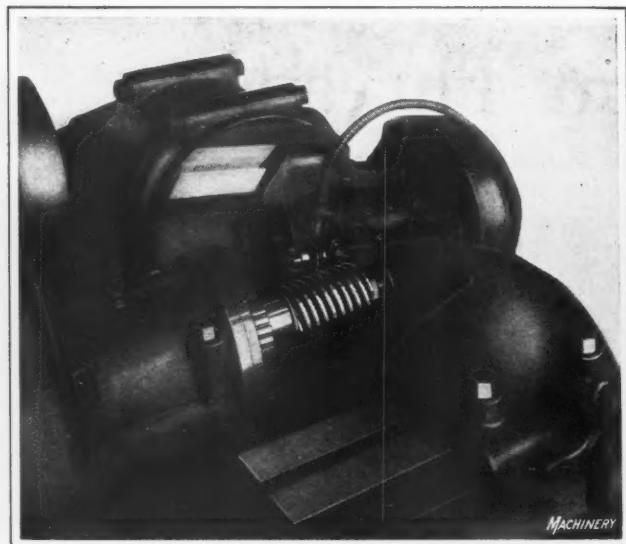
Gear Generator equipped with Auxiliary Cutter-spindle for milling Worms
